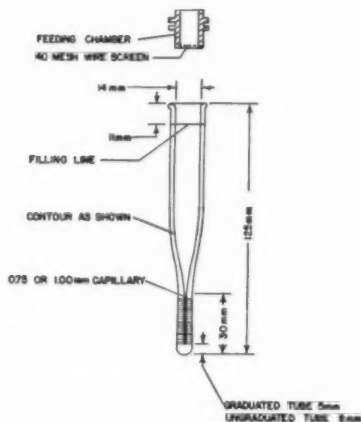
CENTRIFUGE TUBE AND FEEDING CHAMBER DESIGN
